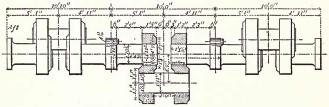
Built-up crank-shaft of a marine-engine.
